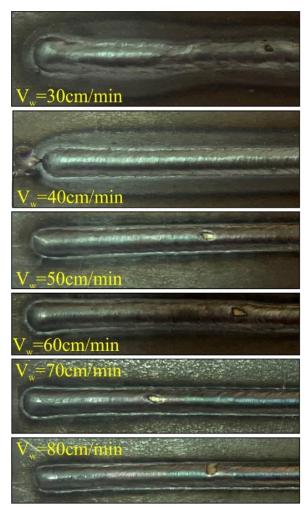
Samples obtained by handheld laser welding with changes in $V_{\rm w}$.
